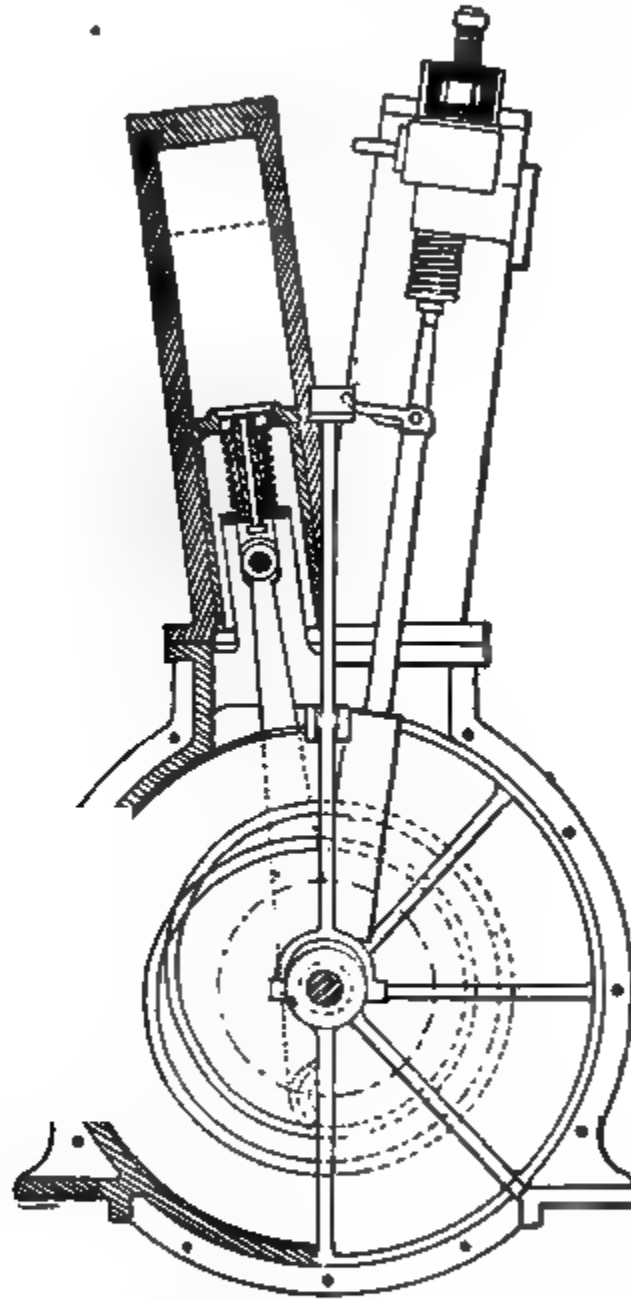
Part sectional view of the Daimler V-shaped Gasoline Engine, showing the air valve in the piston and eccentric cam grooves on the fly-wheel disc. The method of opening the exhaust valve is also indicated.
